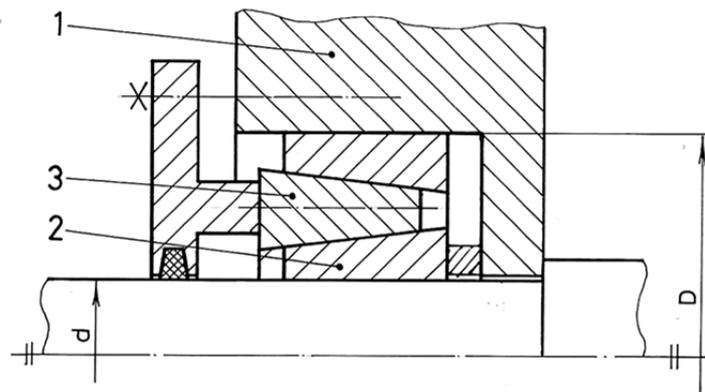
Composing elements of the assembly with intermediate biconical elements: 1 – outer ring; 2 – inner ring; 3 – intermediate ring.
